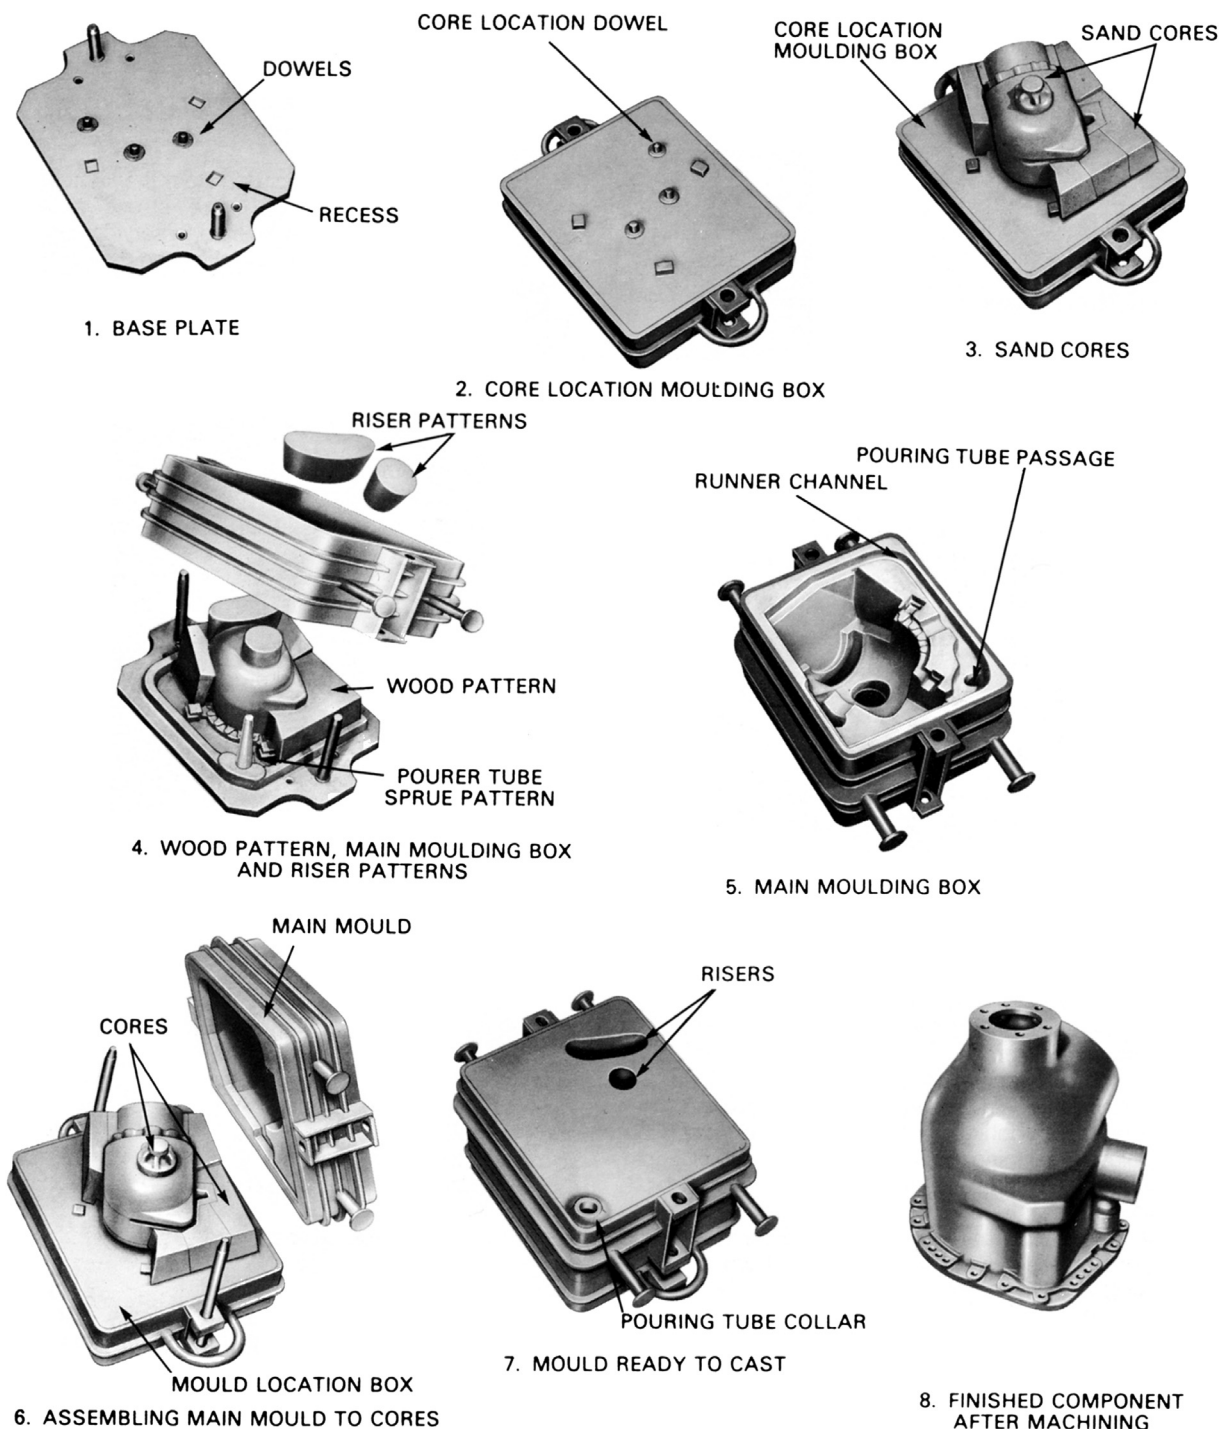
Method of producing an engine component by sand casting. (Source: Rolls Royce.)
